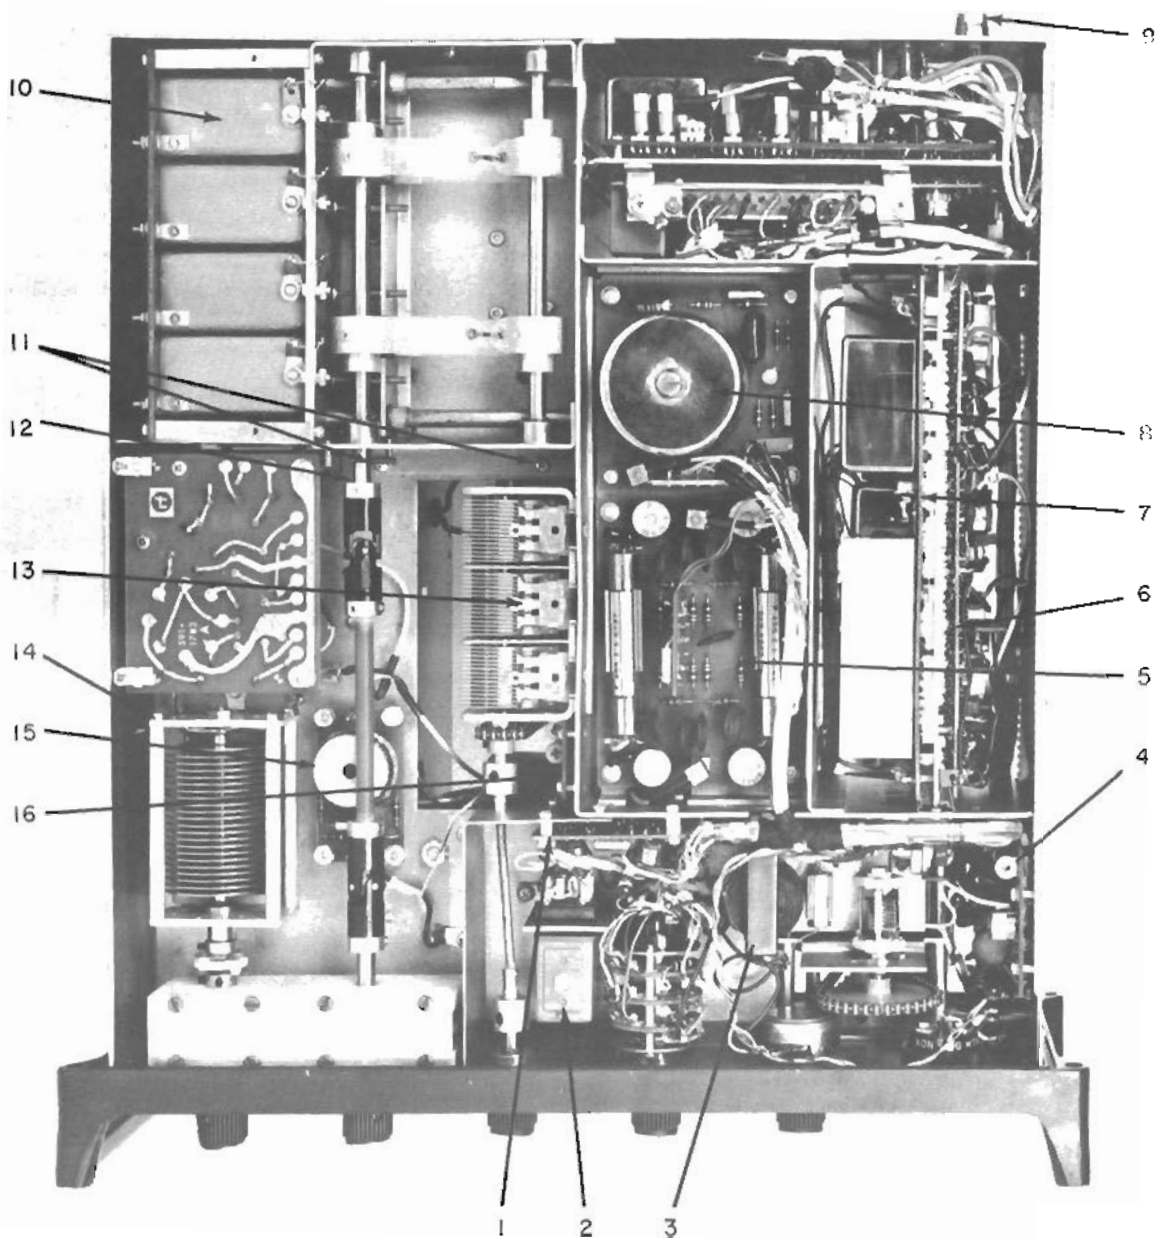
ASSEMBLY IDENTIFICATION, TOP OF TRANSCEIVER CHASSIS
